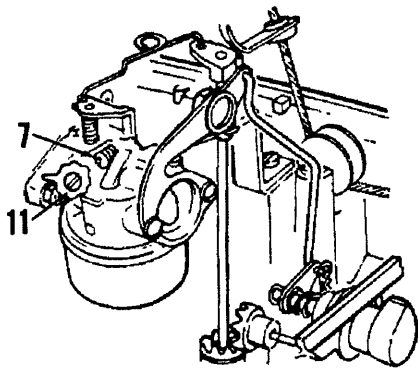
View of throttle and choke linkage. Refer to Fig. E3-2 for legend.
